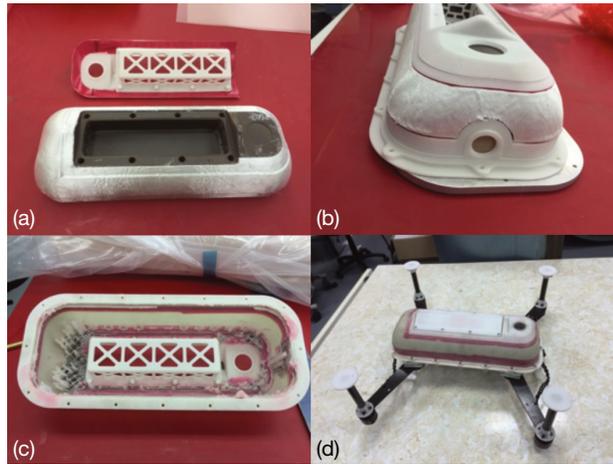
Example of APL's novel additive manufacturing process using soluble tooling depicting (a) the soluble tool wrapped in fiberglass, (b) frames added to the tool, (c) the structure after tool dissolution, and (d) the assembled vehicle frame.
